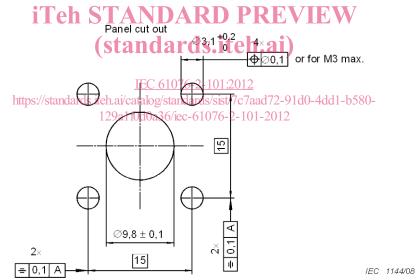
Fixed connector, male contacts, mounting with thread M12  $\times$  1, square flange front mounting
